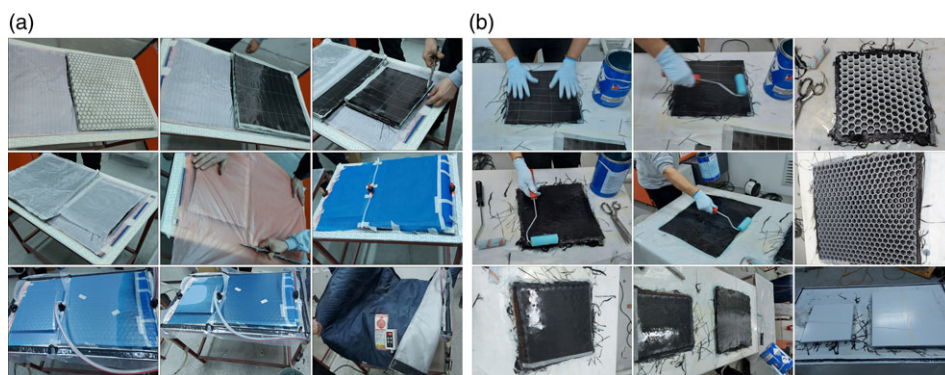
Images of sandwich composite production (a) sandwich composite production with a polyurethane foam core using the vacuum infusion technique, (b) sandwich composite production with a hollow honeycomb core using hand lay-up and the vacuum bagging technique.
